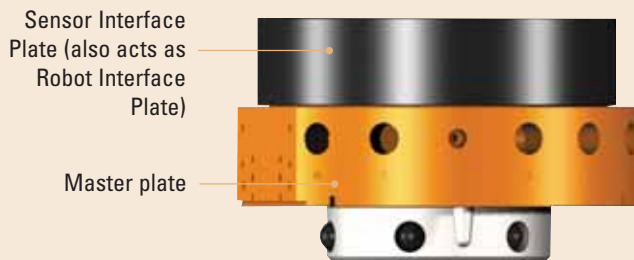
Side view of Master plate with Sensor Interface Plate (SIP) system.
